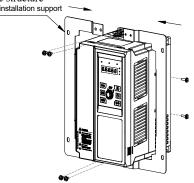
Embedded Support Installation Diagram of Plastic Structure
